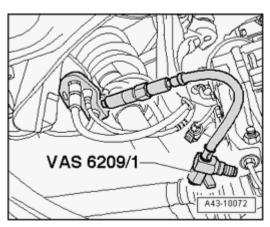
Loosening Lock Nut On Line To Be Checked & Screwing In Shut-Off Screw Until It Is Hand Tight
